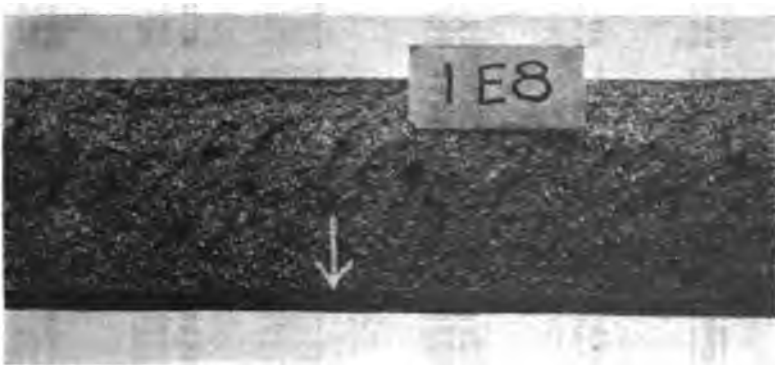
VERTICAL LONGITUDINAL FRACTURE OF FLANGE, SHOWING LONGITUDINAL SEAM IN BOTTOM OF BASE.
